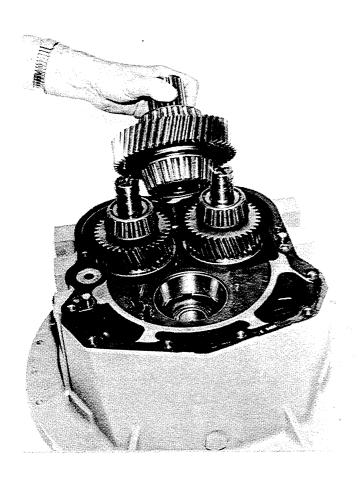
Removing or Installing Output Shaft and Gear Assembly.
